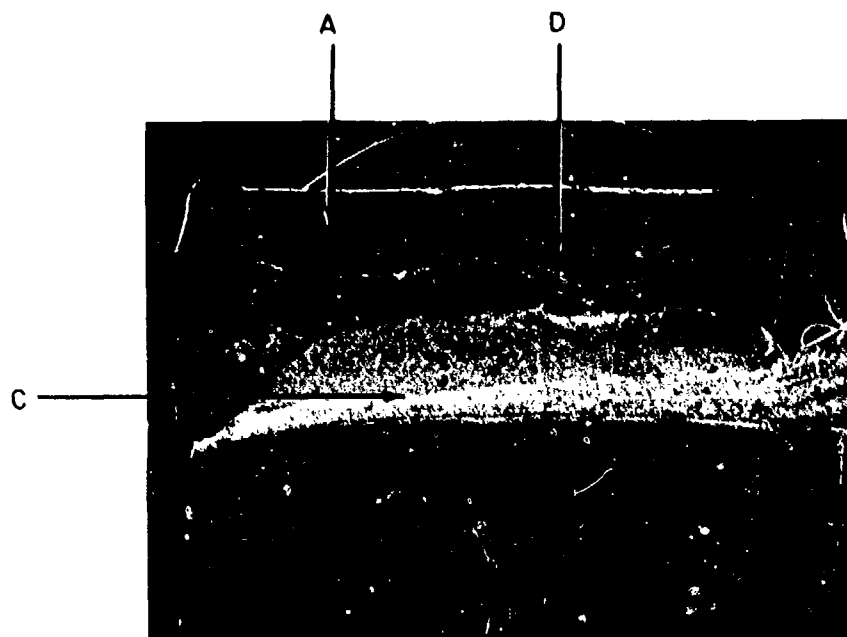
Tensile fracture surface of an A-514 weldment containing LOP, 8x.
